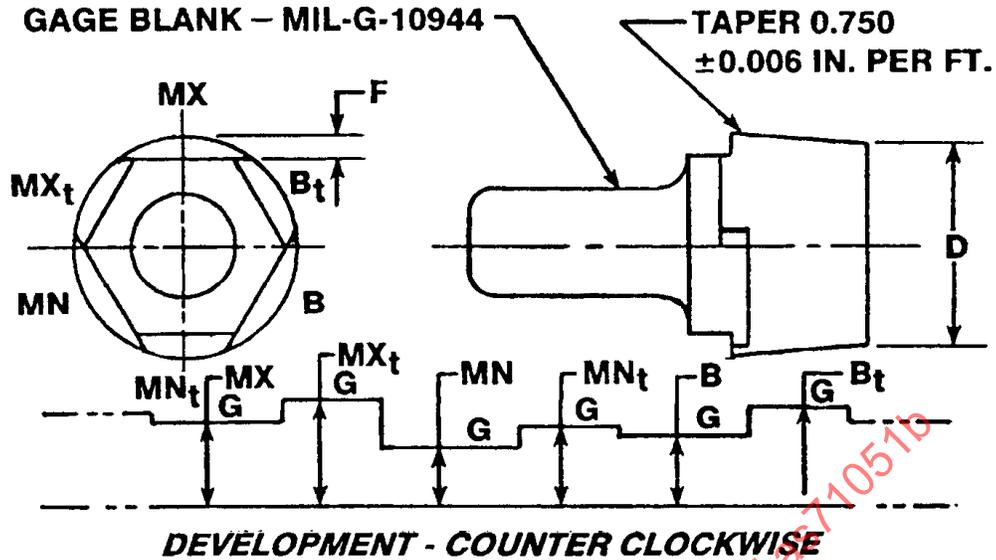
TAPER THREAD - L<sub>3</sub> PLUG GAGE
